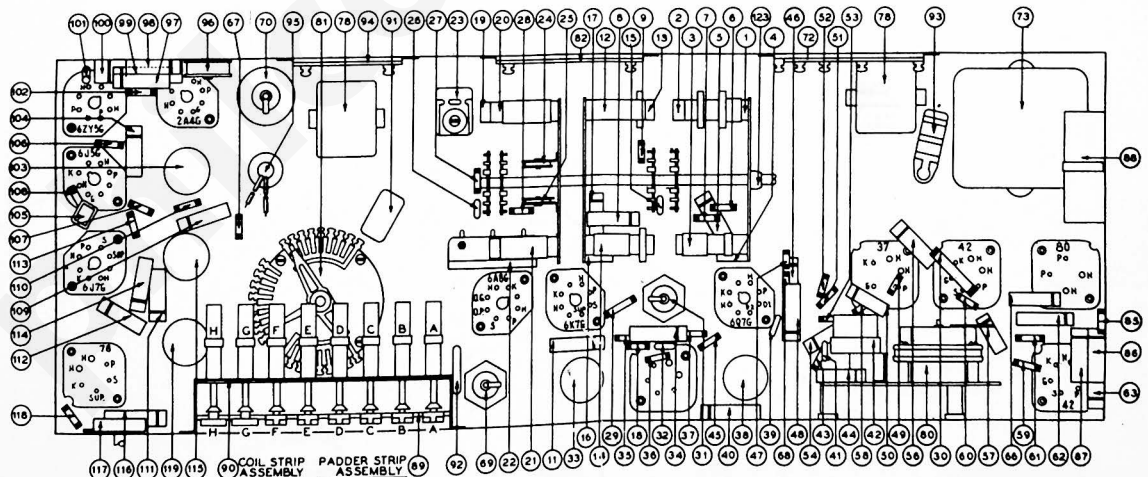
Model 39-116 Part Locations Underside of Chassis
